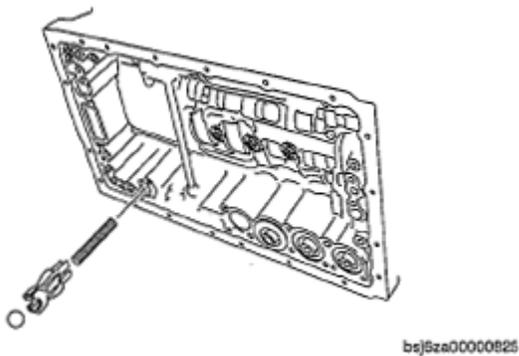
Identifying Check Valve Subcomponent And Compression Spring
